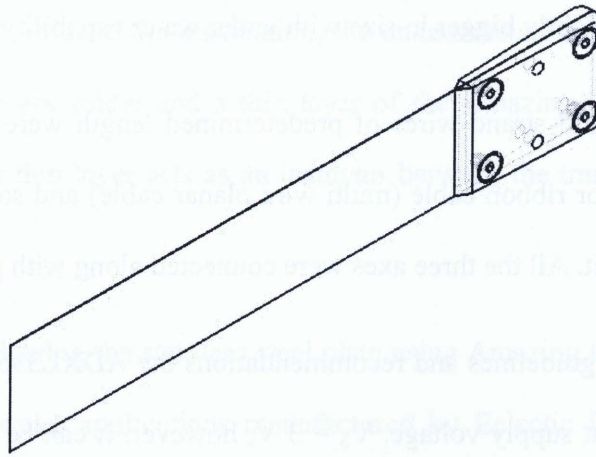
Isometric view of the permanent assembly of the cantilever plate to the aluminum adaptor with M4 flat head screws
